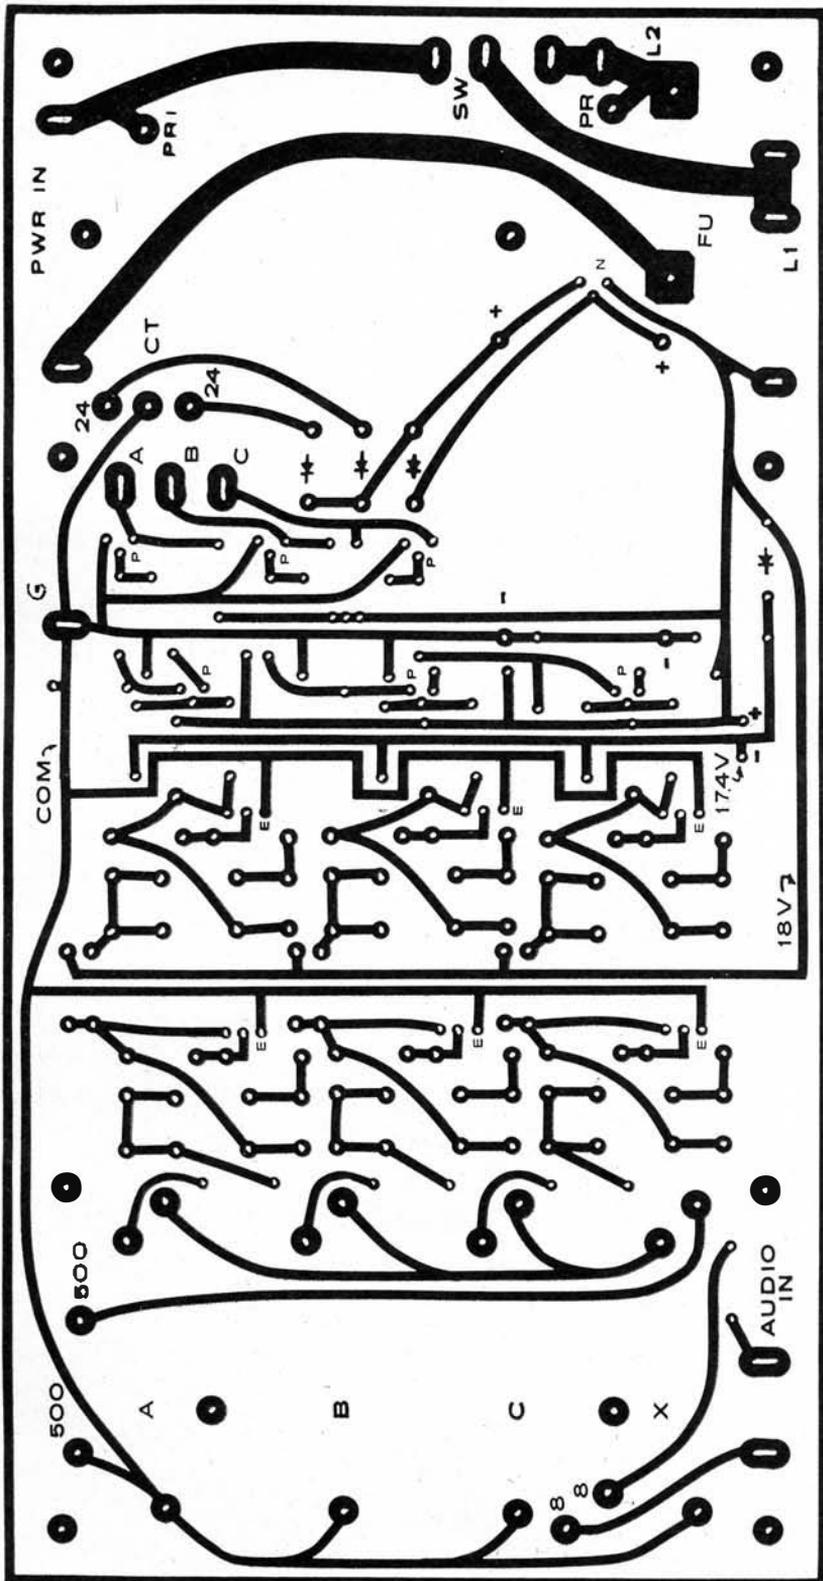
You can copy this actual-size foil pattern for the QFU PC board or buy the board readymade.
